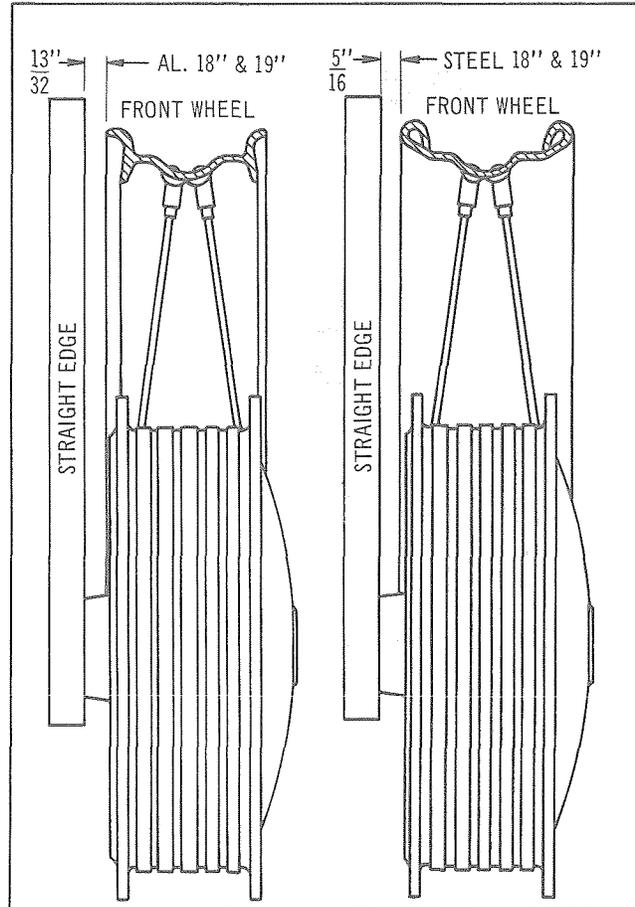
C-19A. Aligning Wheel With Straight Edge (1964 and Later)
